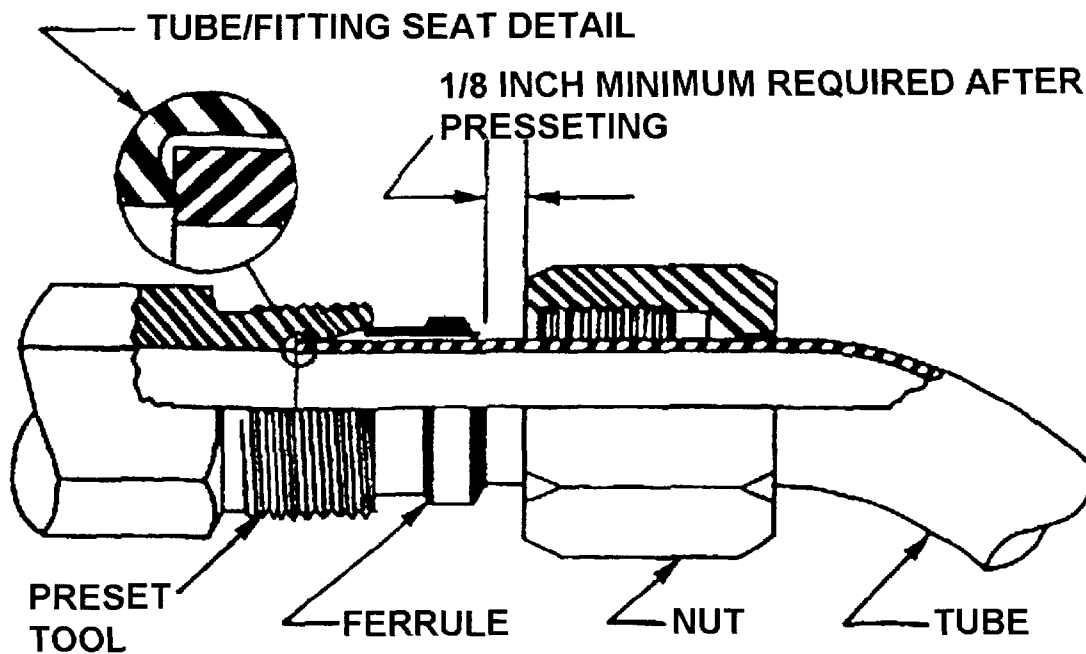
Tube and Ferrule Assembled for Presetting, Showing Nut Position Required for Inspecting Ferrule.
